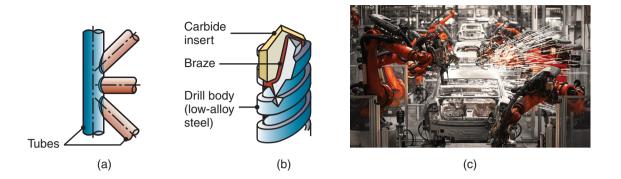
Examples of parts utilizing joining processes. (a) A tubular part fabricated by joining individual components. This product cannot be manufactured in one piece by any of the methods described in the previous chapters if it consists of thin-walled, large-diameter, tubular-shaped long arms. (b) A drill bit with a carbide cutting insert brazed to a steel shank—an example of a part in which two materials need to be joined for performance reasons. (c) Spot welding of automobile bodies. *Source:* (c) Shutterstock/Jensen.
